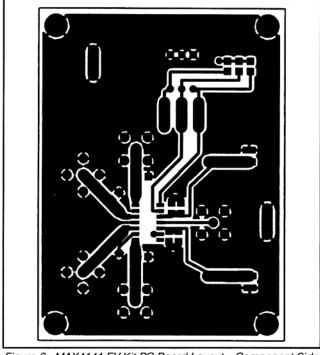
MAX4141 EV Kit PC Board Layout—Component Side
